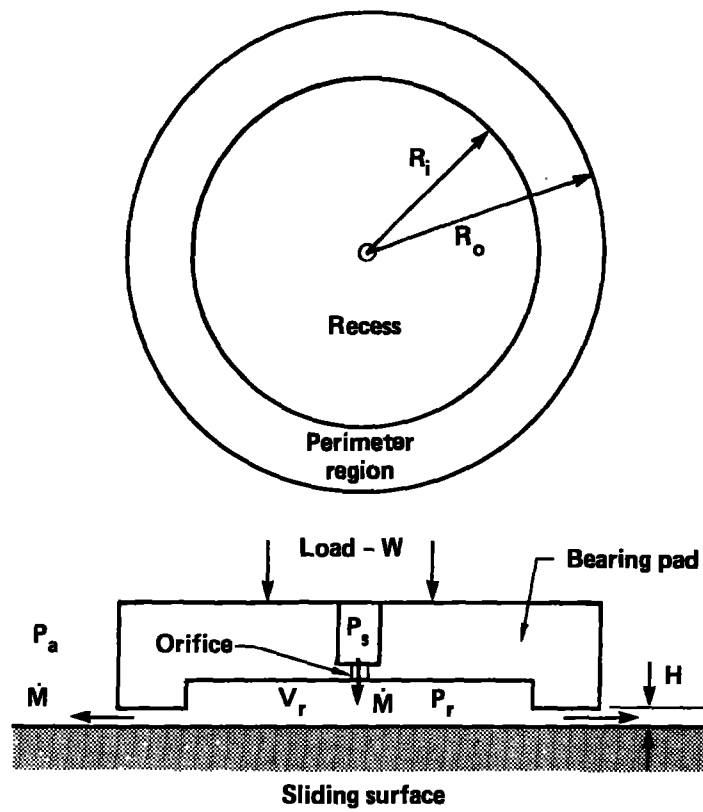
,b. Geometry and gas flow paths of flat, circular, thrust bearings.
